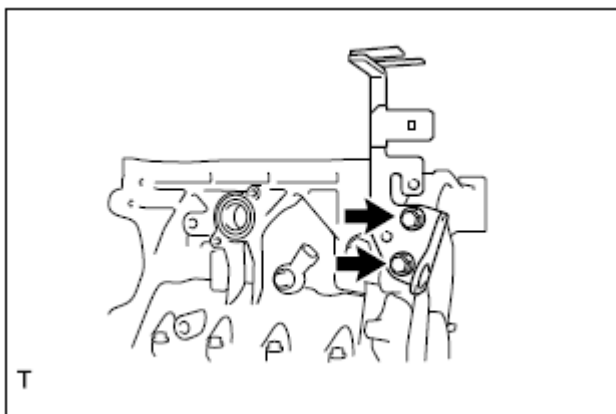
Identifying Cylinder Block Engine Hanger No. 2 Mounting Bolts (Bank 1 Side)
